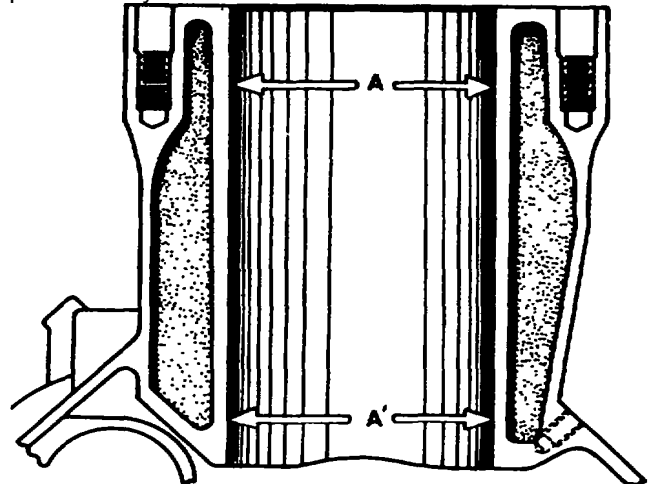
Measurements for Checking Cylinder Bore Out-of-Round
